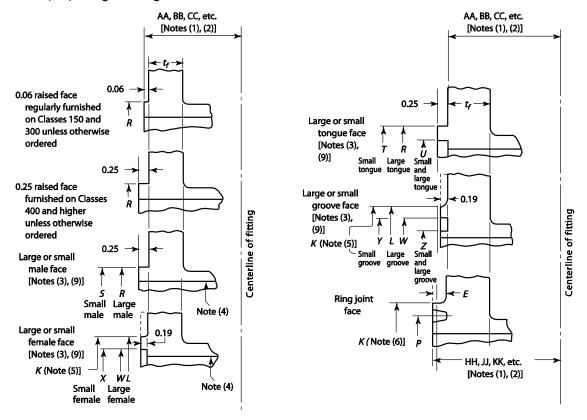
ASME B16.5 – End flange facings [inch] and their relationship to flange thickness and Center-To-End and End-To-End dimensions
